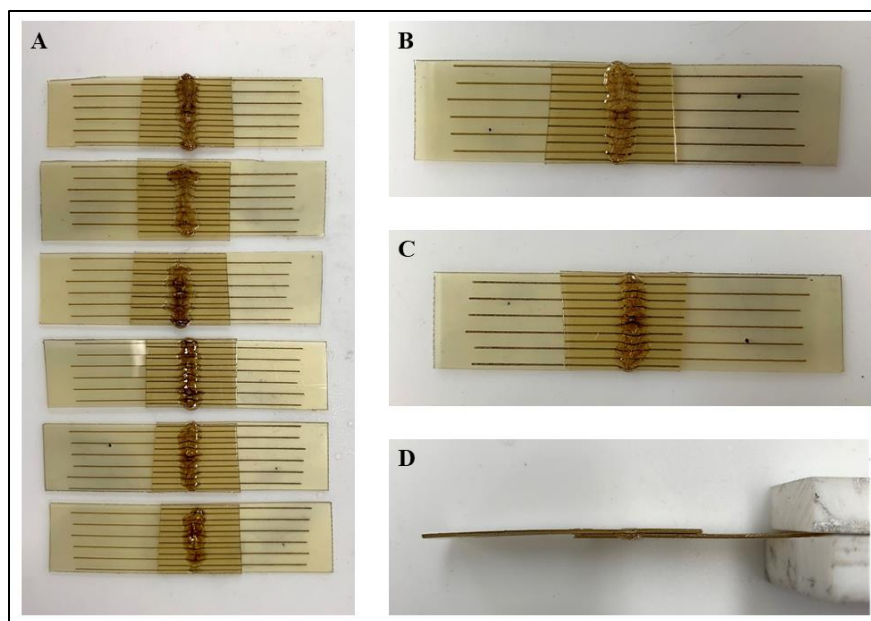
(A) A set of LIG@PEI welded samples. This image shows that weld area is consistent, suggesting that this RF welding process is reproducible. (B-D) Images of a single LIG@PEI sample, showing top (B), bottom (C), and side (D) views.
